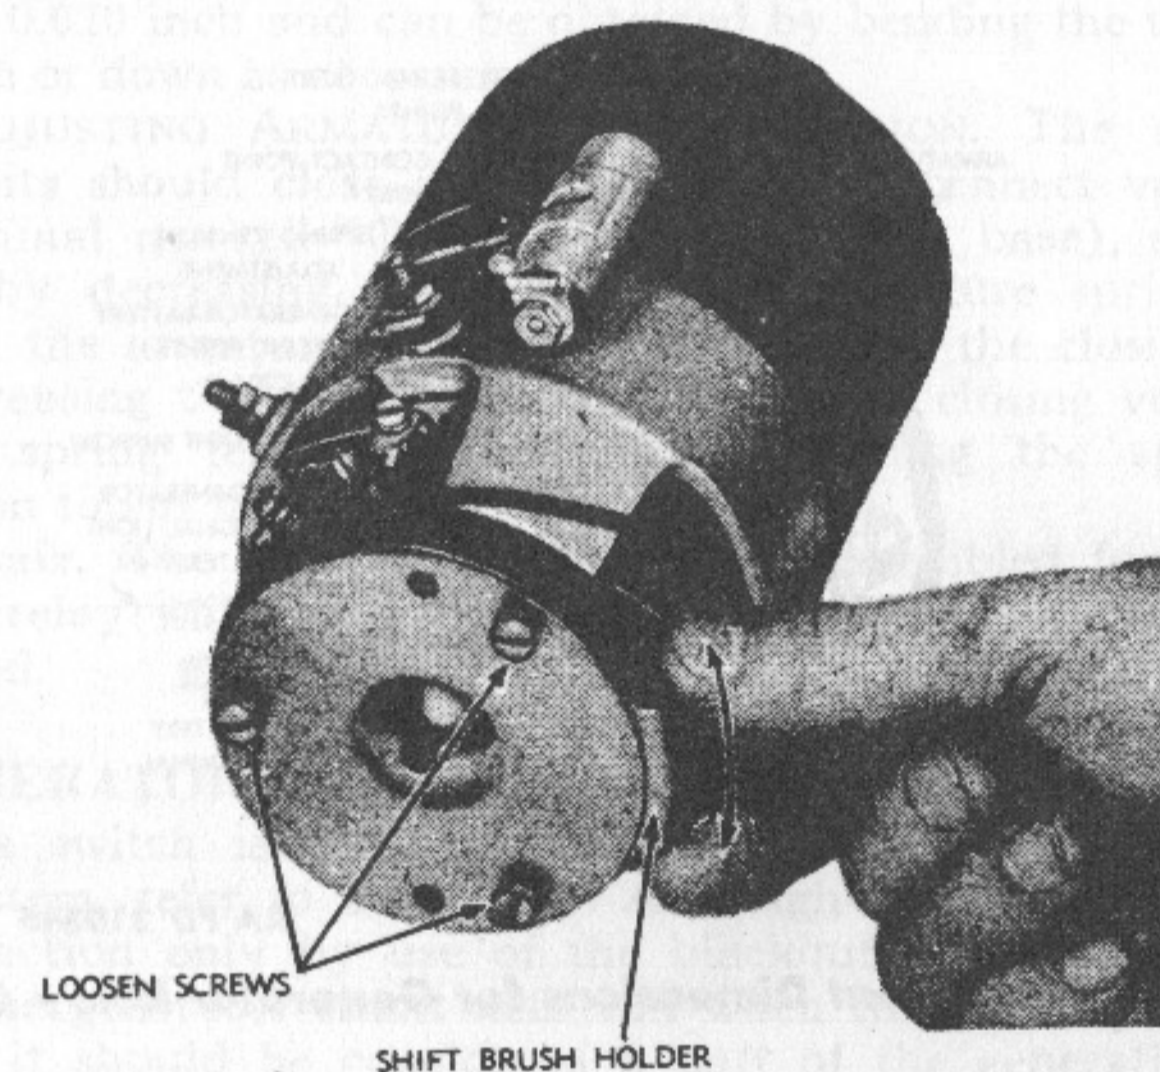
Shifting Regulating Brush to Adjust Current Output of Generator
